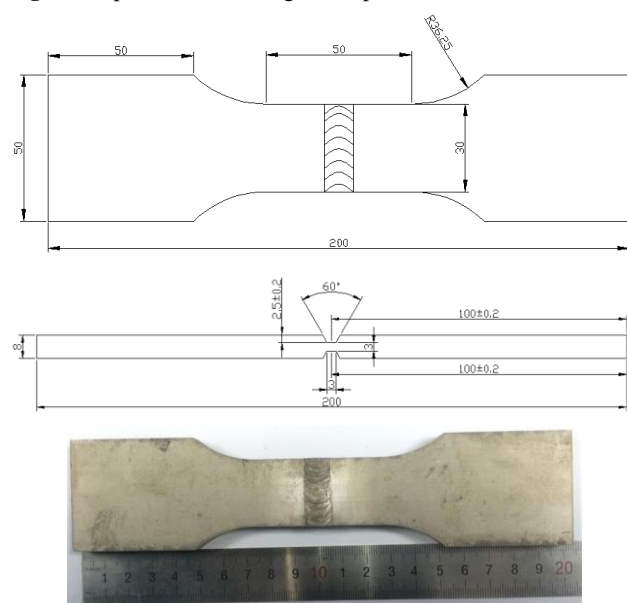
Shape and size of fatigue samples of MB8 welded butt joint
